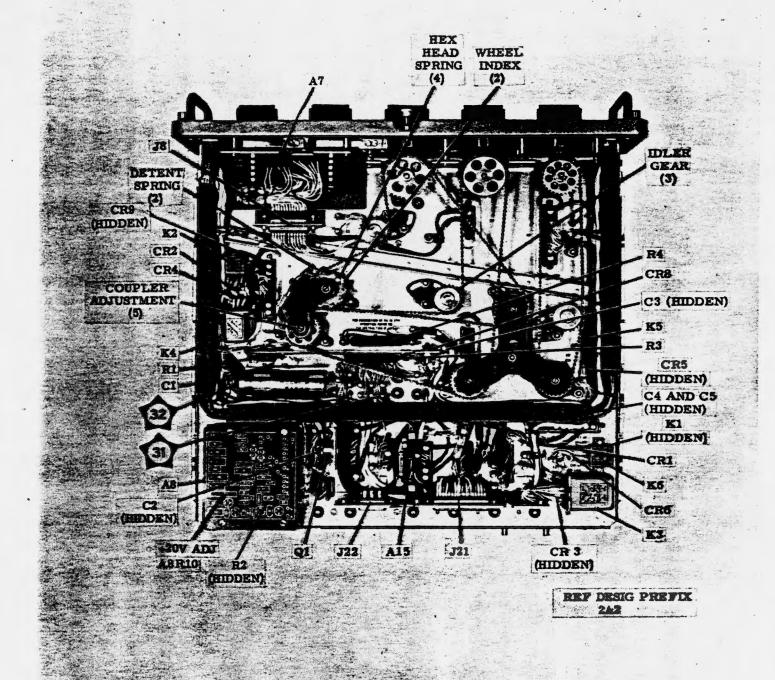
Radio Transmitter T-827/URT, Bottom View, component and Test Point Location (Sheet 1 of 2)
